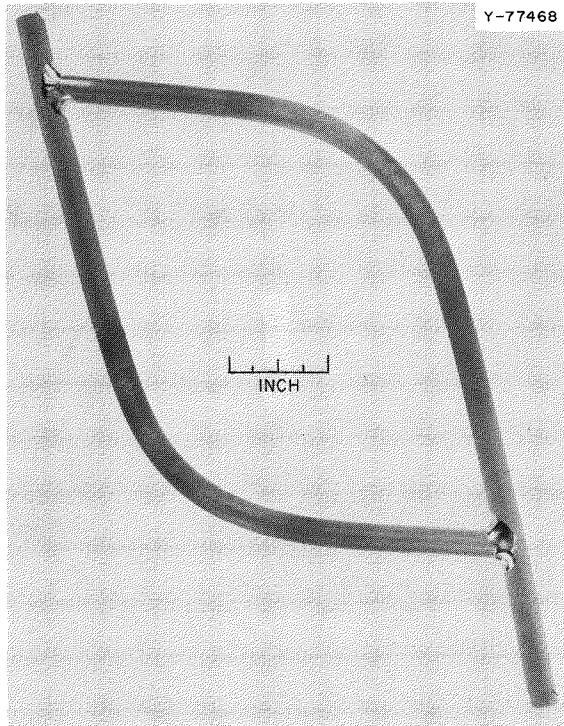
Demonstration Loop Fabricated by Bending and Welding CVD Tungsten Tubing.
